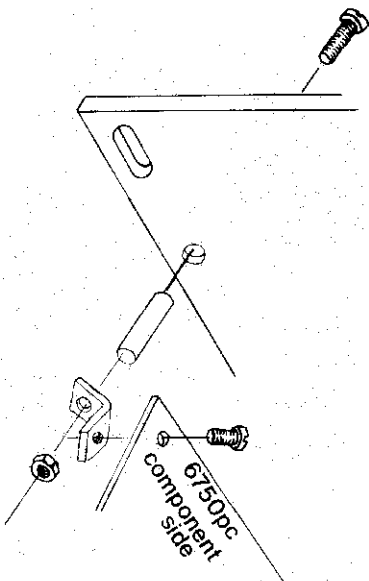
"L" brackets screwed to the circuit board mounts on stand-offs from front panel.
